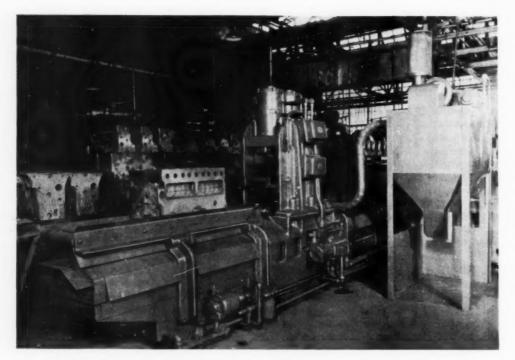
BROACHING CYLINDER-BLOCK BEARING LOCKS IN A SPECIAL HORIZONTAL MACHINE
